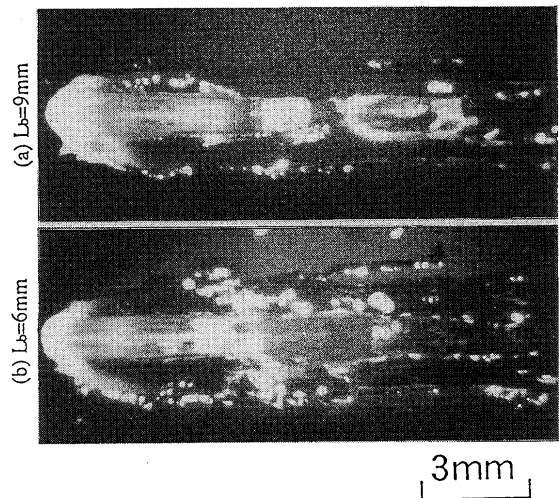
High speed photographs of bead surface in TEB welding.
